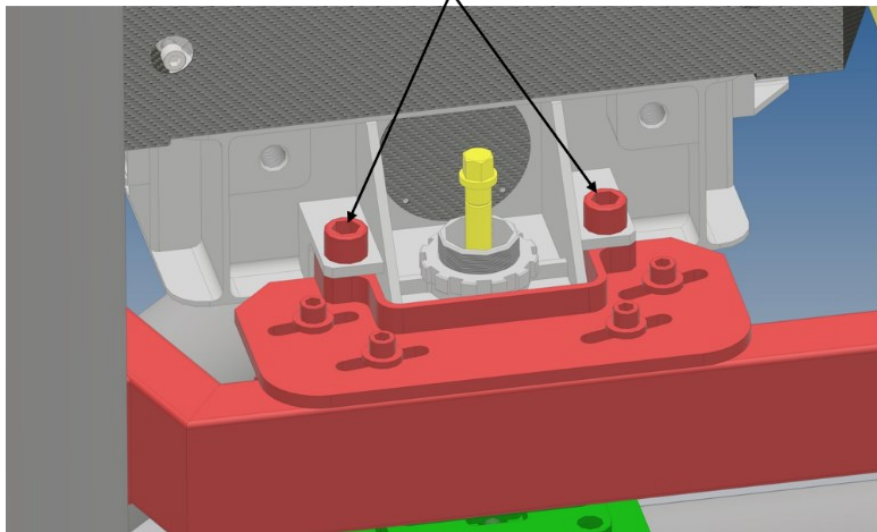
the 4 M20 fixing screws to be removed to free the trolley
